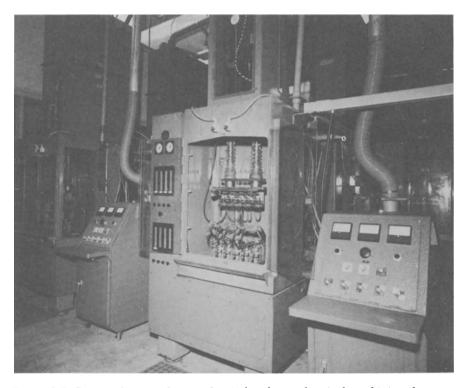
Spray cabinet and control unit for electrochemical machining the longitudinal holes into a turbine blade (see Fig. 8.5). Photograph supplied by Rolls Royce Ltd, Aero Division.
